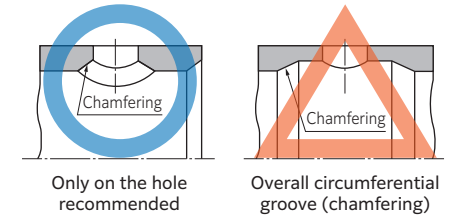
Chamfering of re-lubricating hole on the housing
